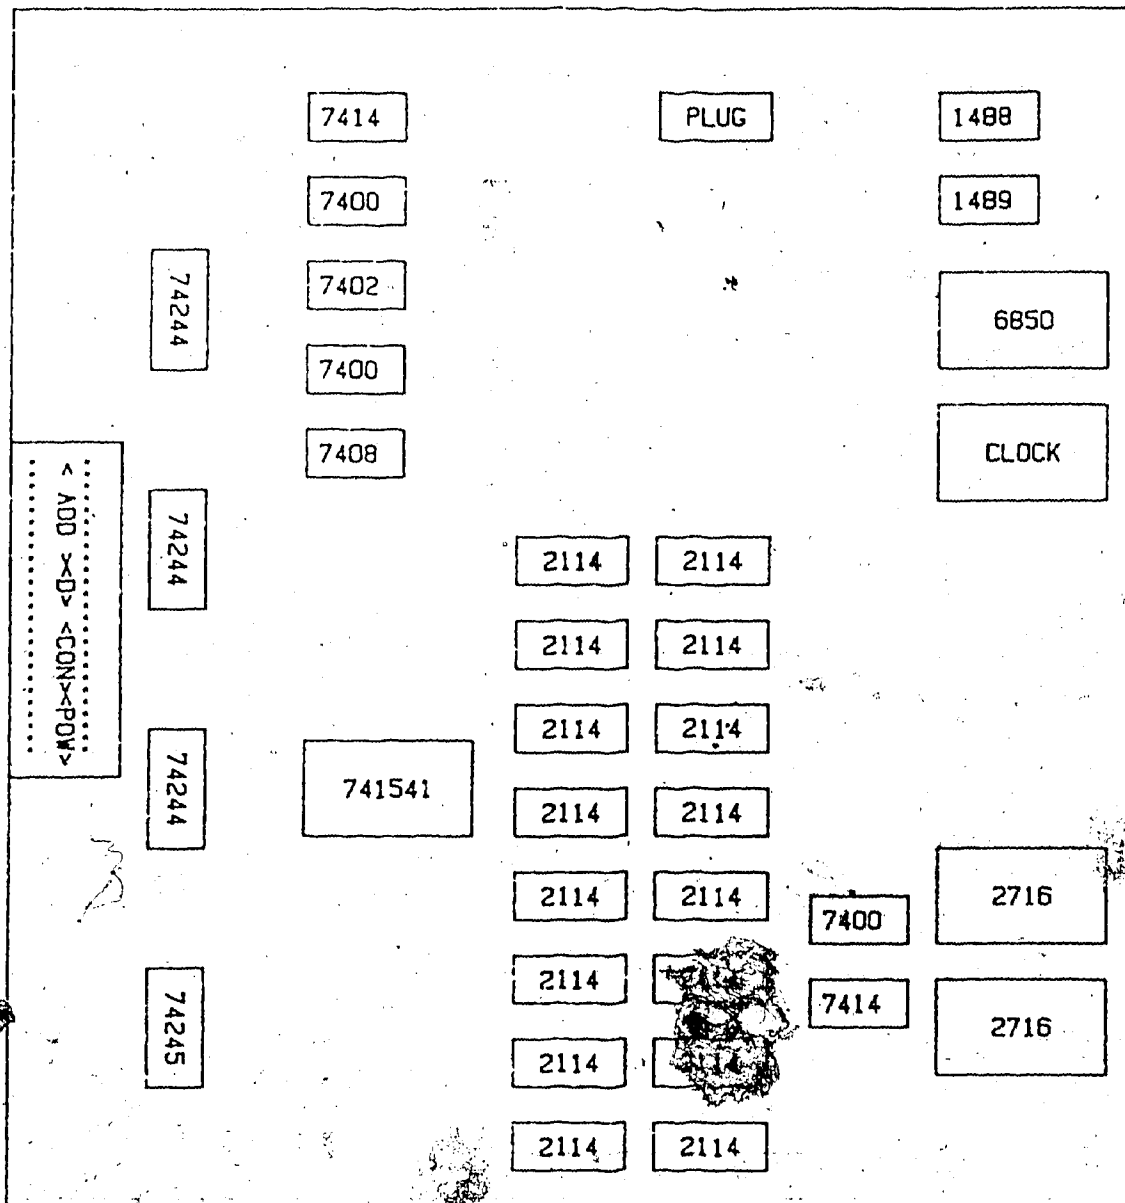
Circuit Board 1 - Memory and RS-232 interface.
